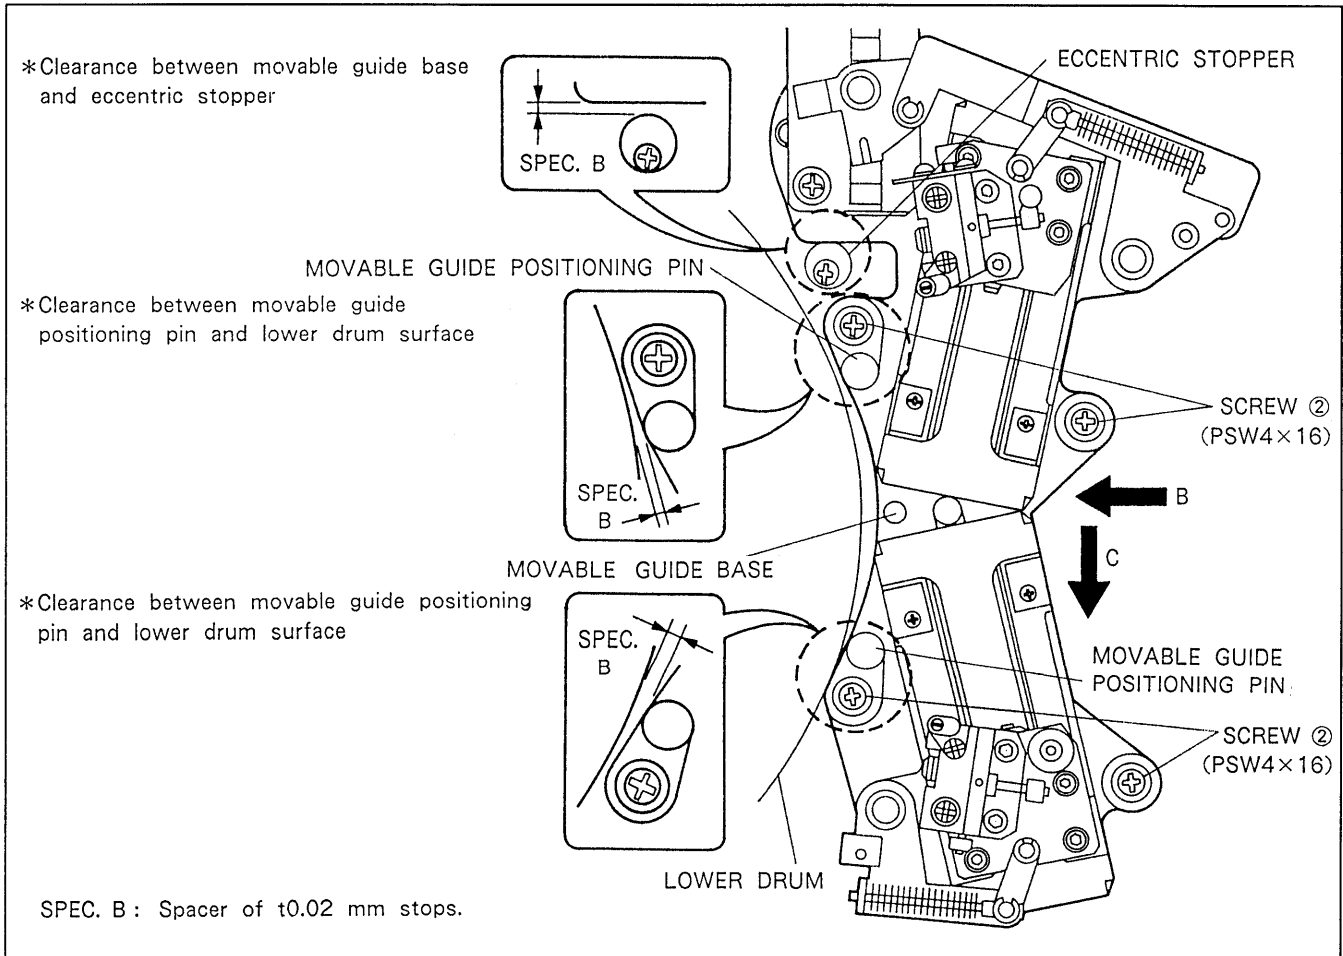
Position Adjustment of the Movable Guide Assembly
